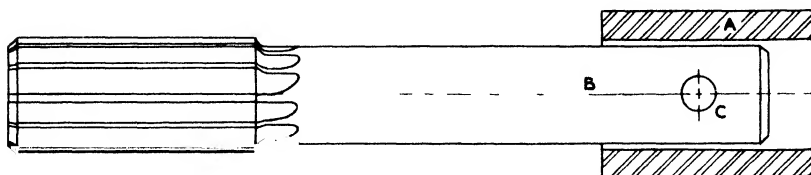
A Floating Holder for Reamers Will Assist in Making the Proper Alignment
